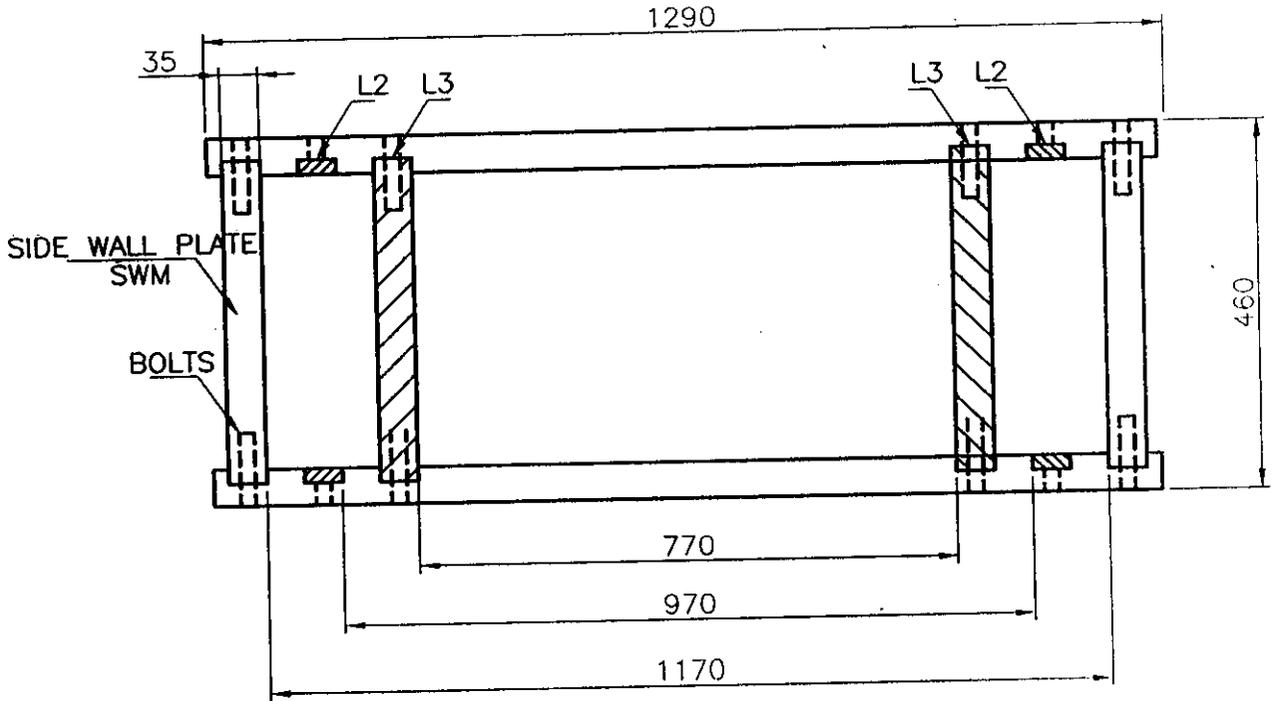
Mould assembly for slab size 390 x 770 x 30mm
